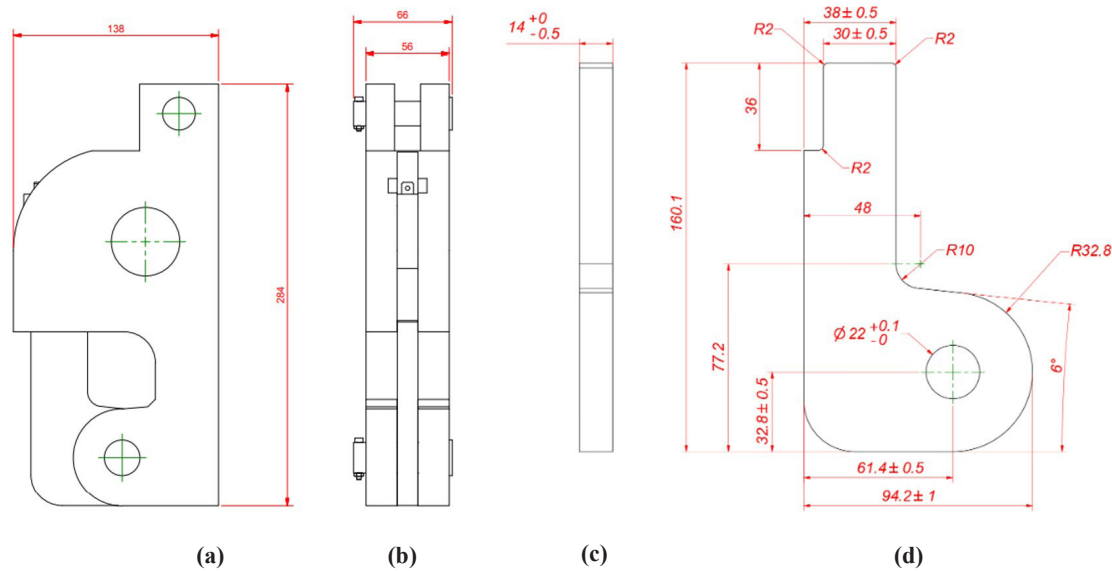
Details of the complete body and the moving body (in millimeters): (a) side view of the complete body; (b) front view of the complete body; (c) front view of the moving body; (d) side view of the moving body.
